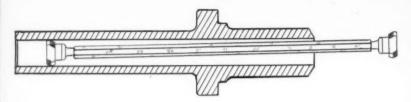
Cross Sectional Diagram indicating how the DuBo Plug Gage checks a long hale.
